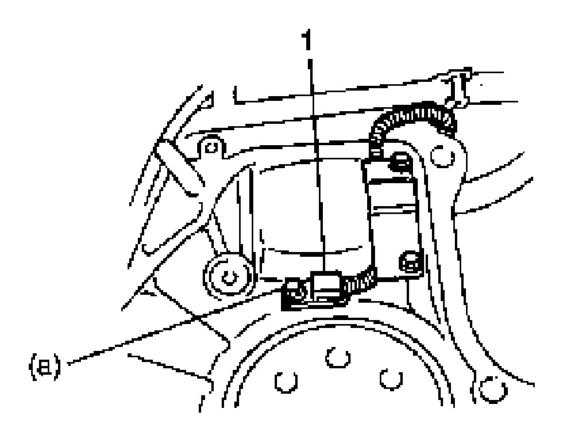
Installing Dowel Pin Courtesy of SUZUKI OF AMERICA CORP.
